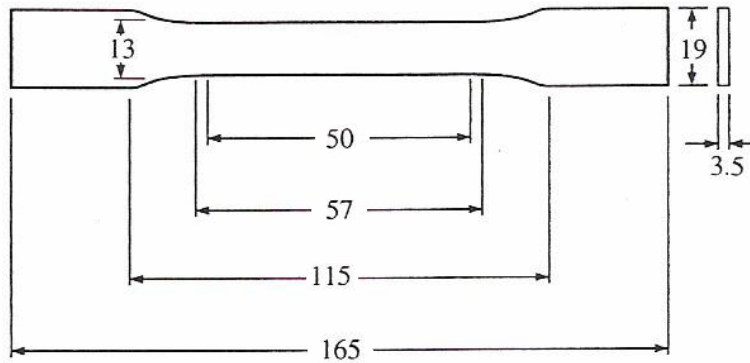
Epoxy tensile test specimen, (Dimensions are in mm).
